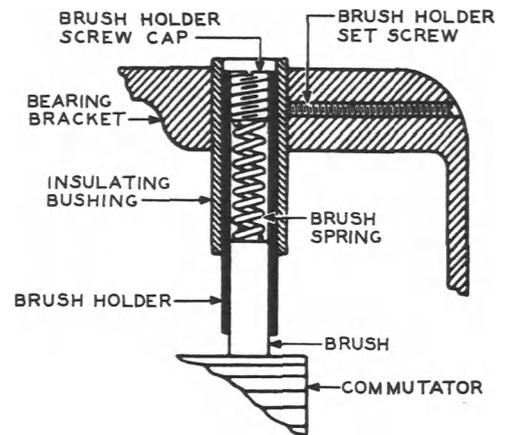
Tubular-type Brush Holder for Waste-packed Bearing Machines
